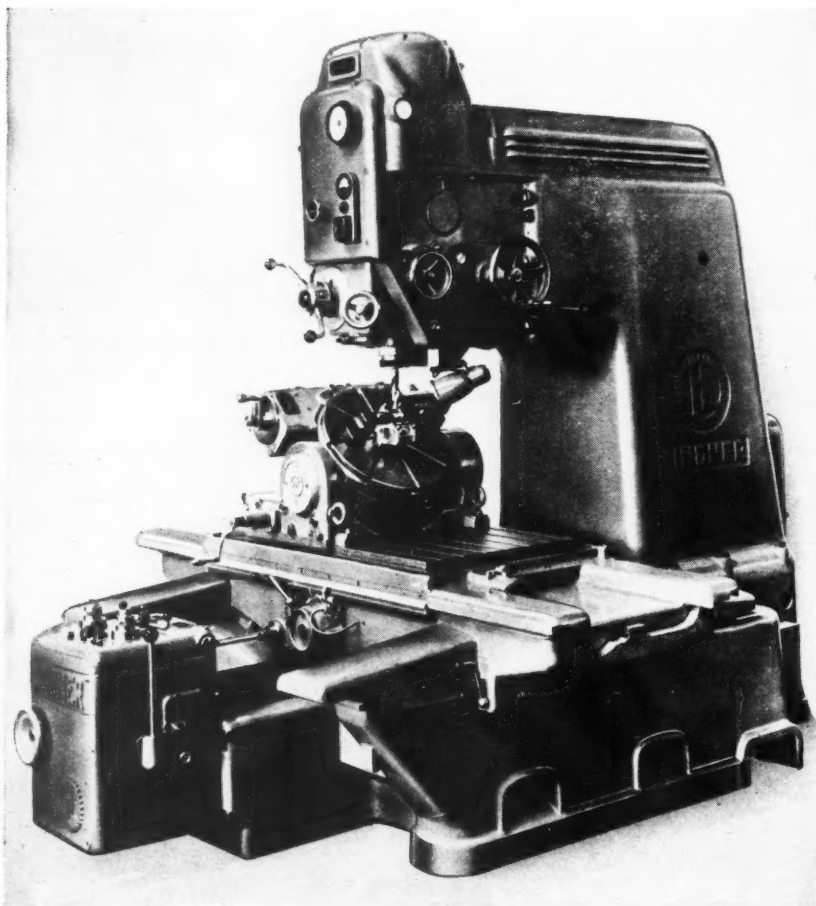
Lindner precision jig boring machine introduced in this country by Kurt Orban Co., Inc.
